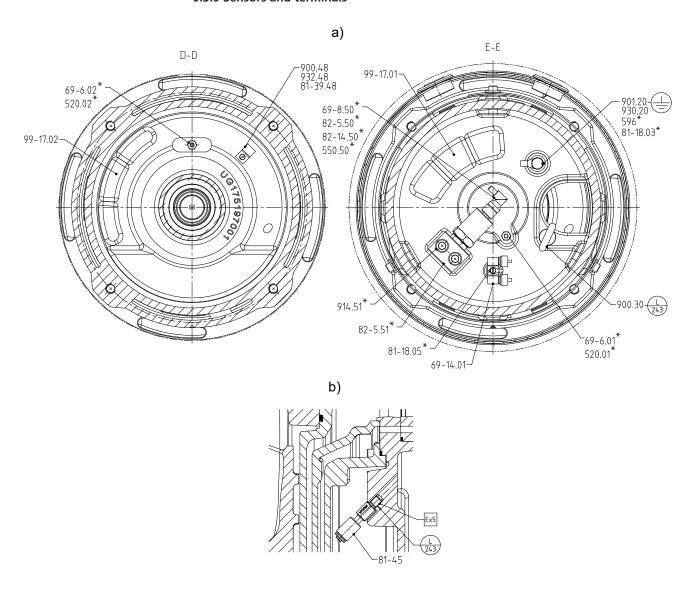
Amarex KRT a) Sensors and terminals depending on the motor size b) Detailed view of the float switch
